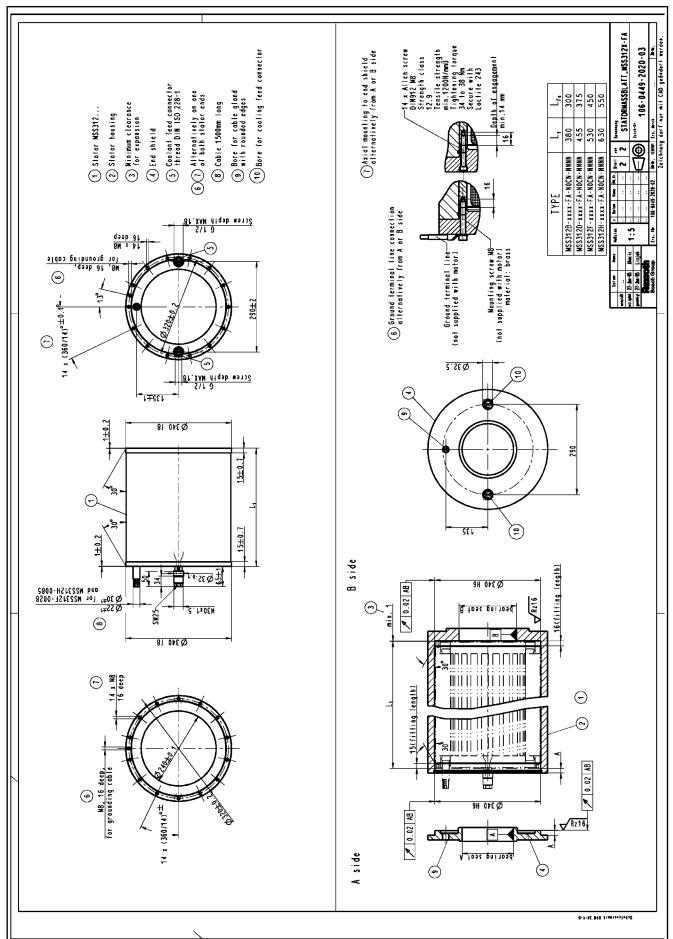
MBS312 with radial cooling connection and rotor design "1N"
